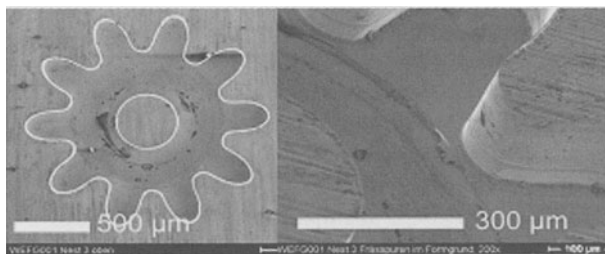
Steel mold cavity (53 HRC) for micro gear (l.) and detail of milled edge (r.)
